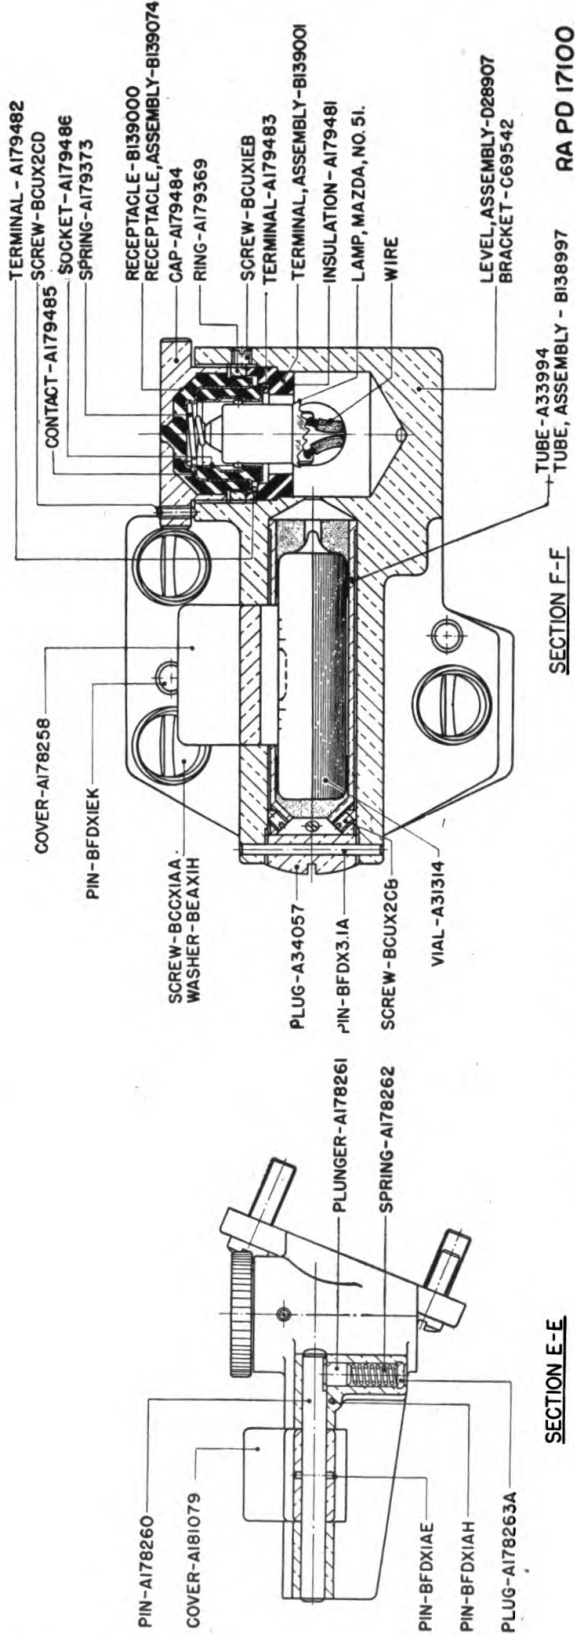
Leveling mechanism assembly—Sections E-E and F-F.
